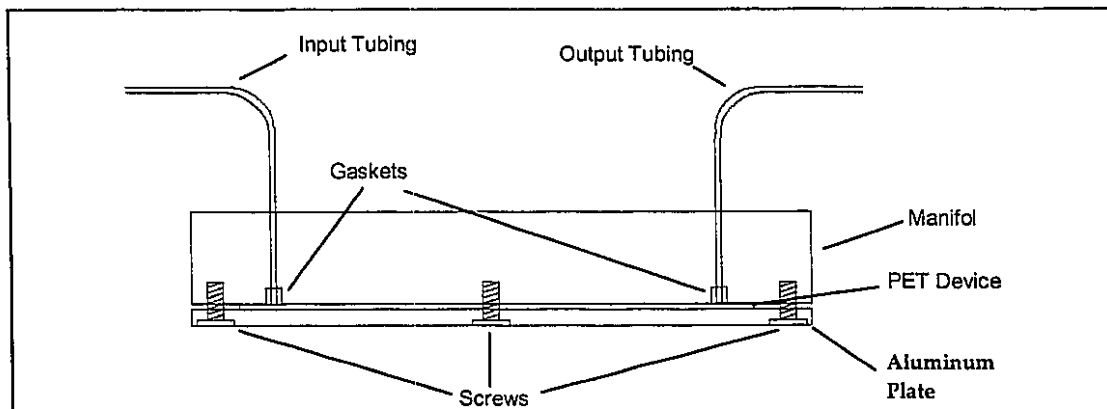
Fluidic manifold assembly for a stacked mylar device. Pressure on the device, delivered by the screws passing through an aluminum plate, secures the fluidic access points on the device to the gaskets in the manifold. Fluidic input and output tubing passes through these gaskets and are held against the access points on the device.
